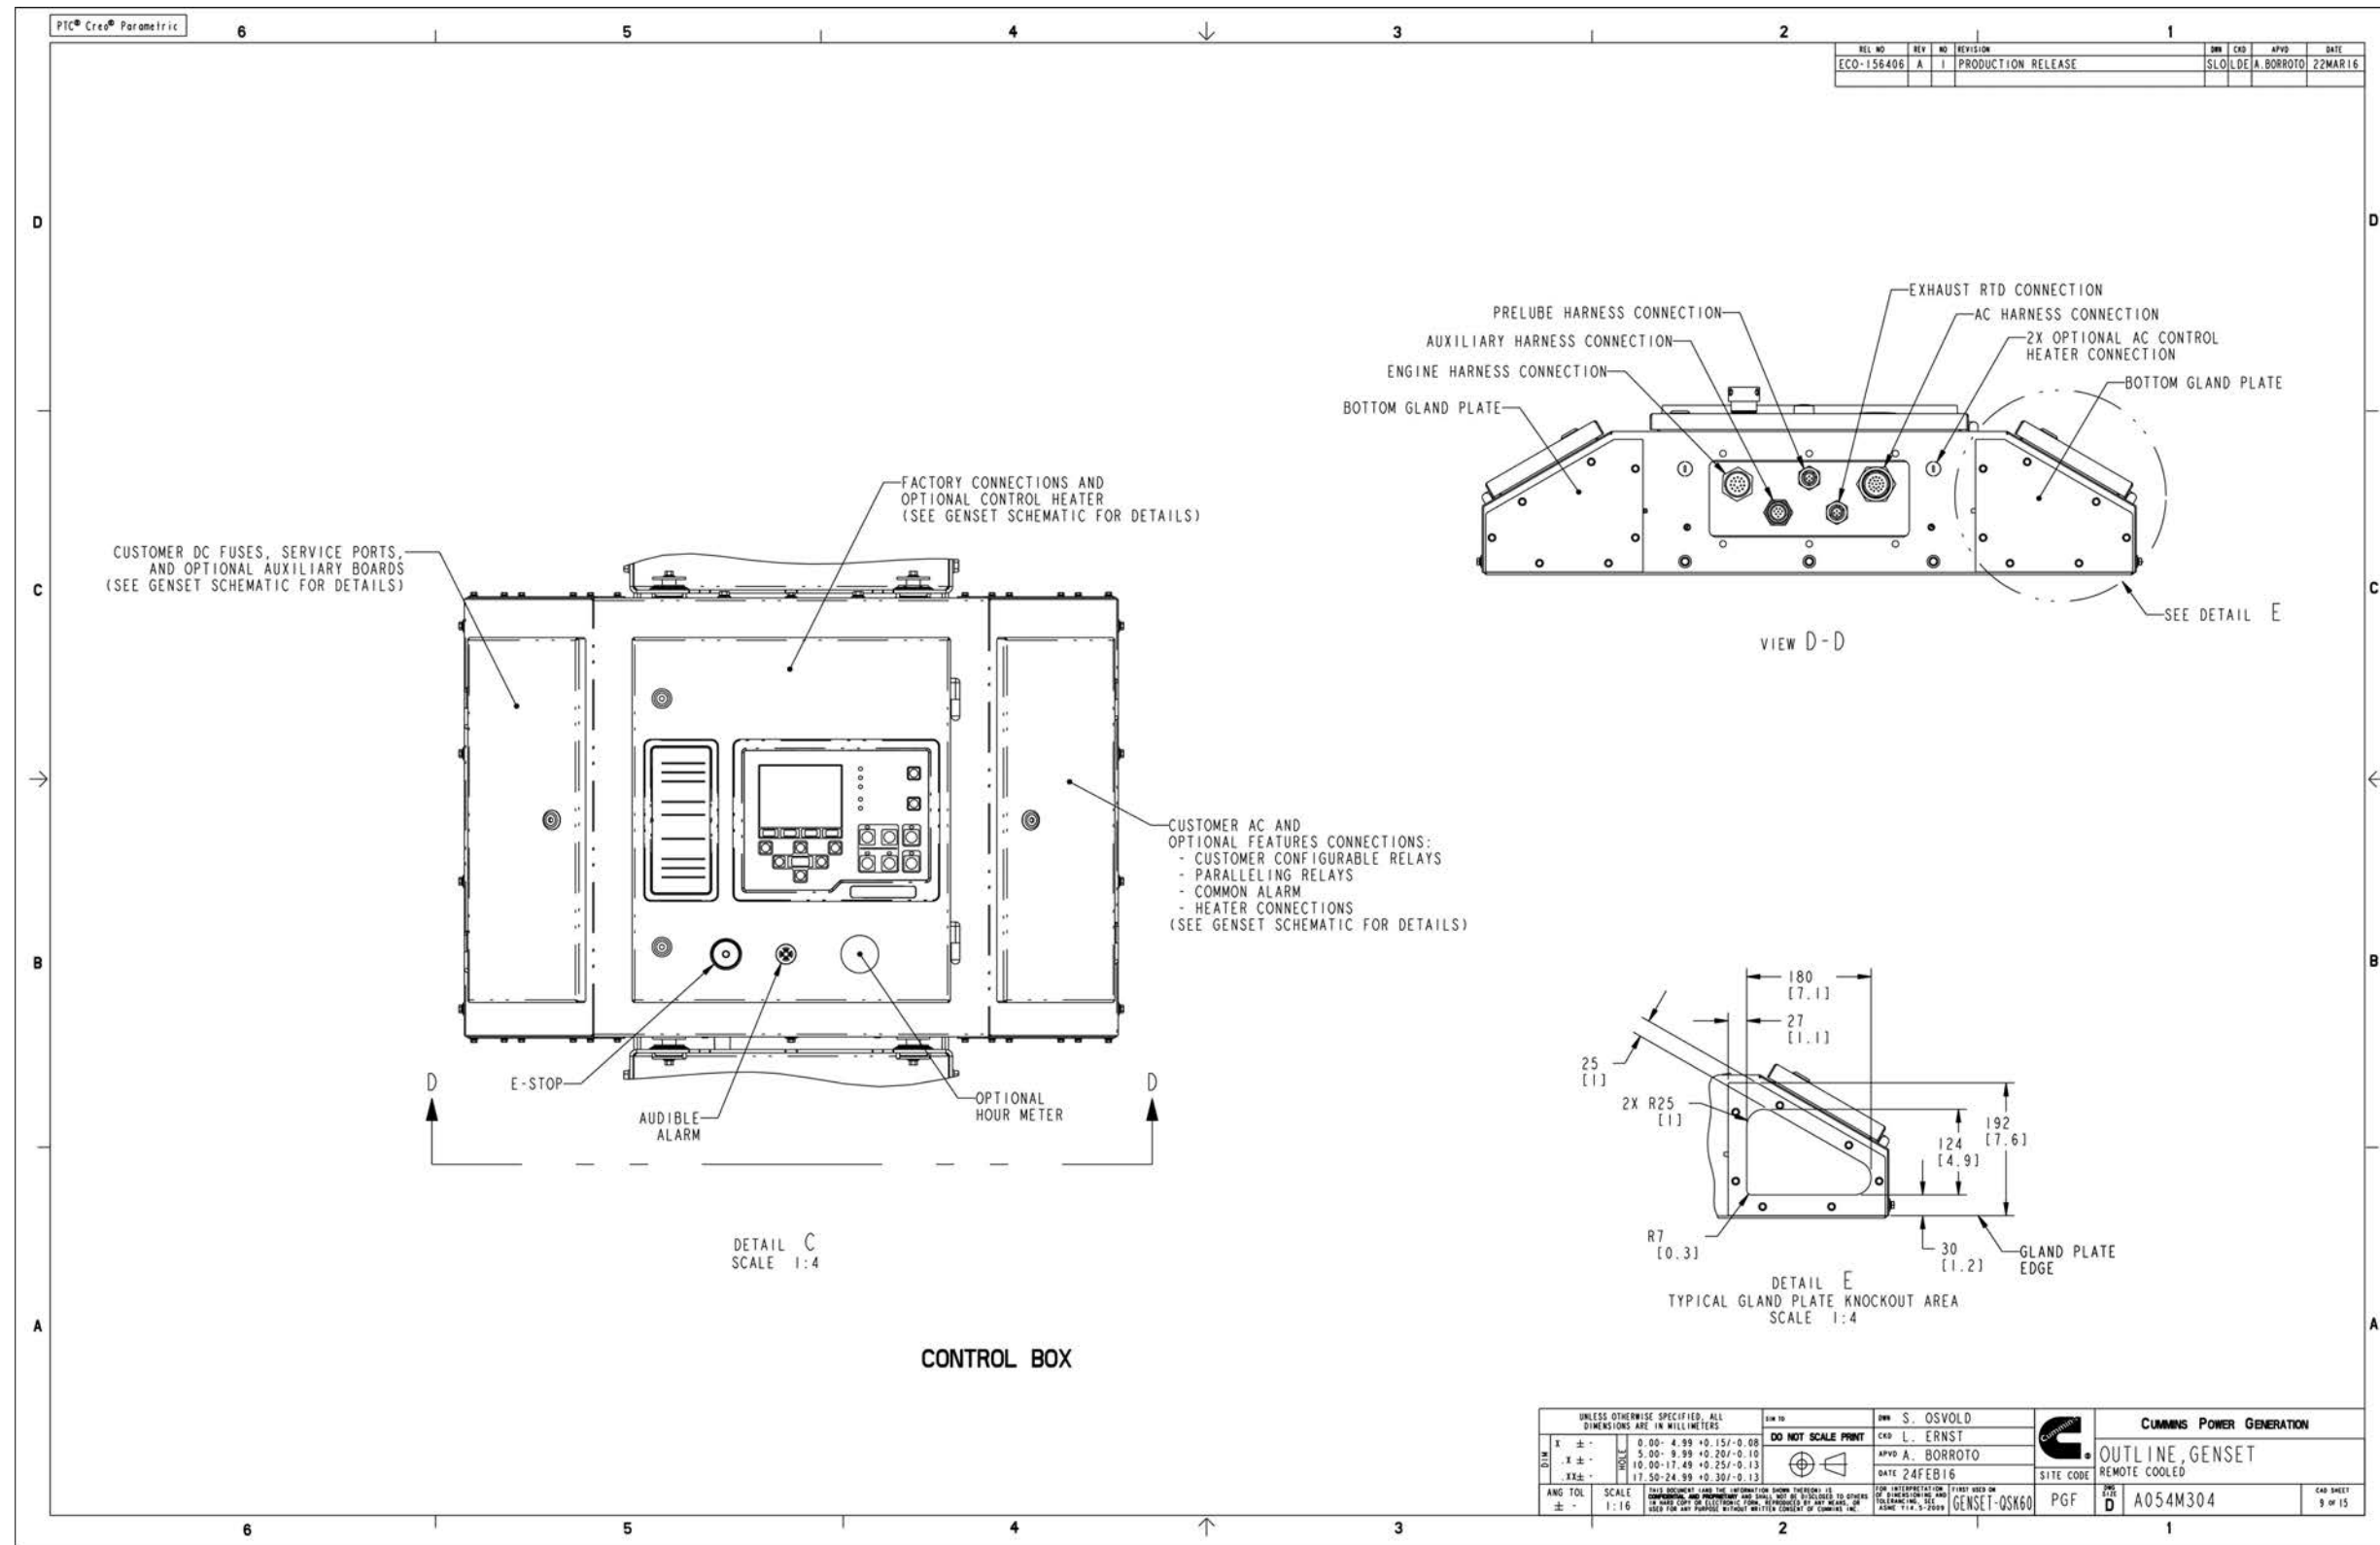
GENERATOR SET WITH REMOTE COOLING OUTLINE DRAWING (SHEET 9)
